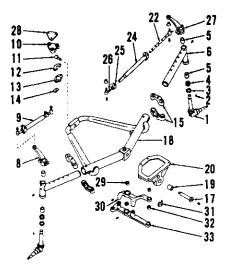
Exploded view of Series 424, 444, 2424 and 2444 narrow tread adjustable front axle and component parts.
